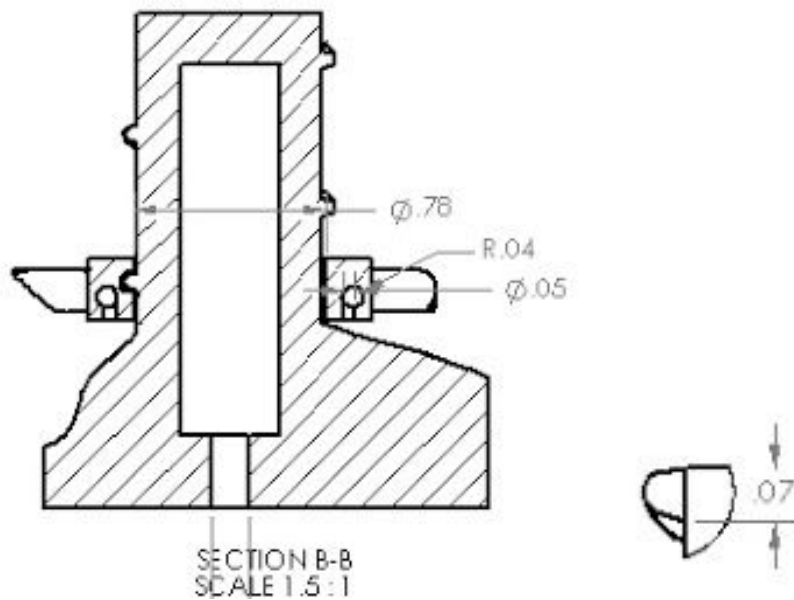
Design modifications showing a single internal channel, channel drain, and enlarged threads.
